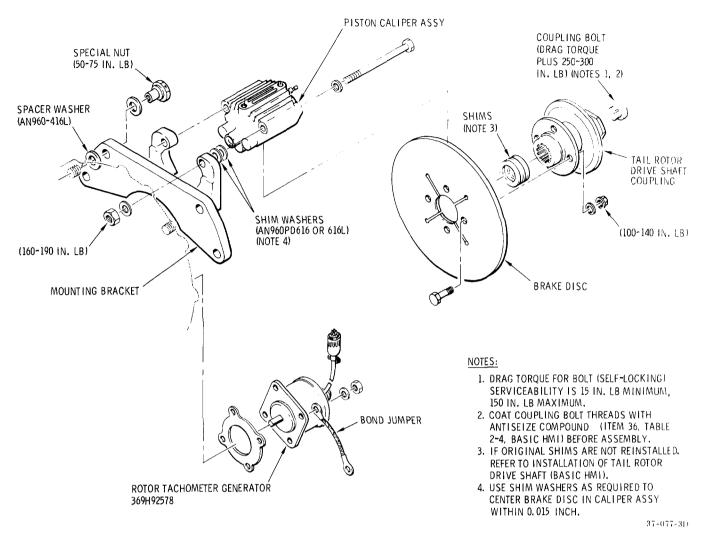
Rotor brake installation (sheet 3 of 3)
